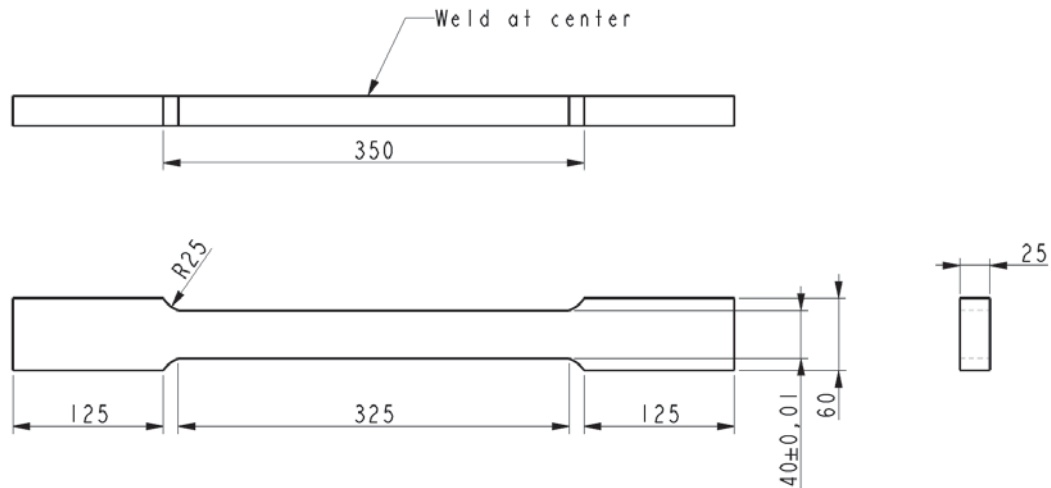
Test series 3, laser-hybrid welded joints dimensions
